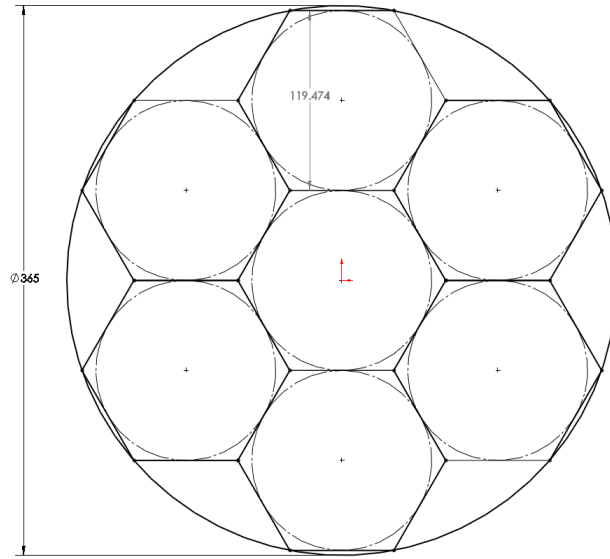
CAD drawing of focal plane planning. Circle represent 365 mm available focal plane area. Hexagon is 120 mm side to side.
